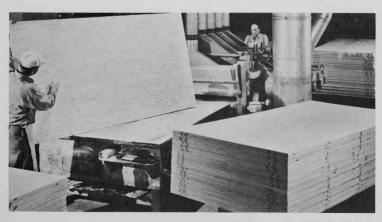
Plywood panels are run through giant power sanders as a final operation in making "wood-and-glue sandwiches" ready for the market. (American Plywood Assoc.)
